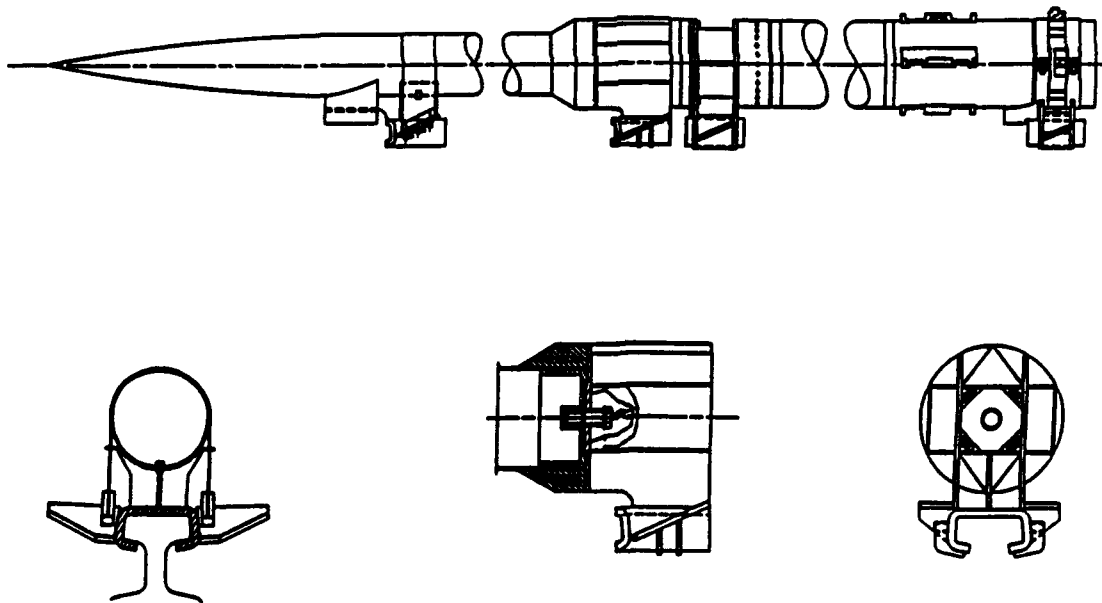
Sled Train Assembly, Front Attachment, Rear Attachment
